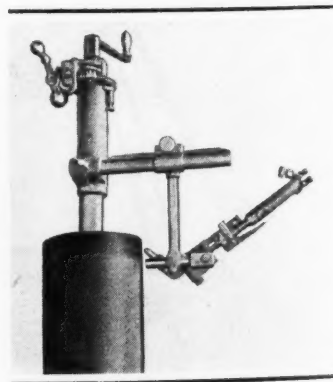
Blow-pipe Machine for Cutting and Beveling Pipe
